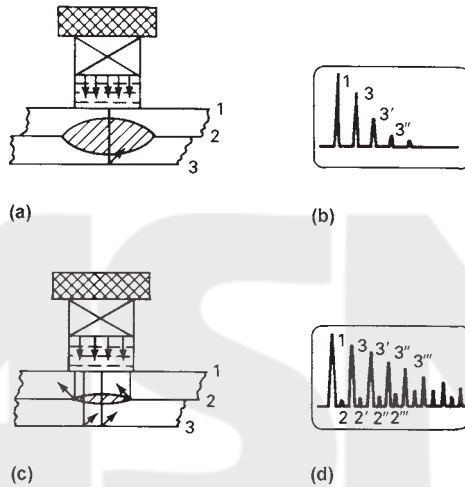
Schematic illustrating setup for the pulse echo ultrasonic inspection of resistance welded spot welds. (a) Wave paths in satisfactory weld. (b) Resulting echoes. (c) Wave paths in an unsatisfactory weld. (d) Resulting echoes. Source: Ref 1
